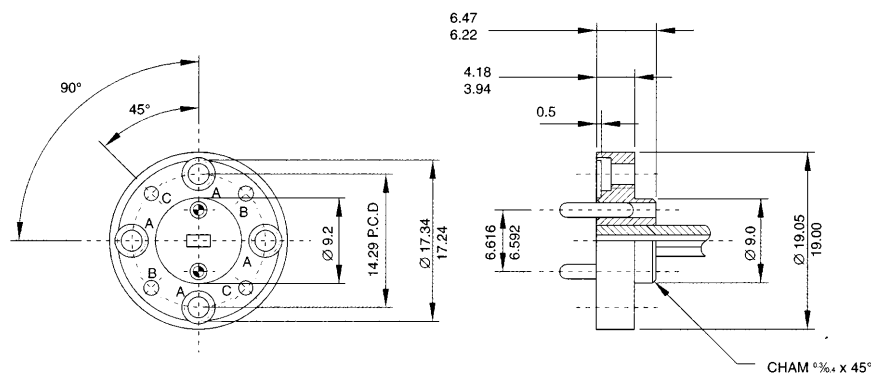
Anti-cocking flange (from the Flann Microwave catalog). This design is fully compatible with the standard UG-387 type of flange. The holes for the removable inner pins are 1.588-1.600 mm dia. Dimensions in mm.
